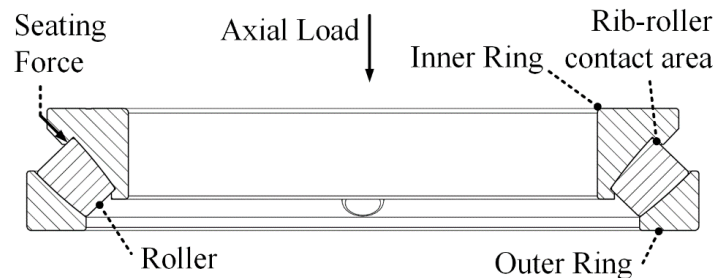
Schematic drawing of an axial spherical tapered roller bearing
